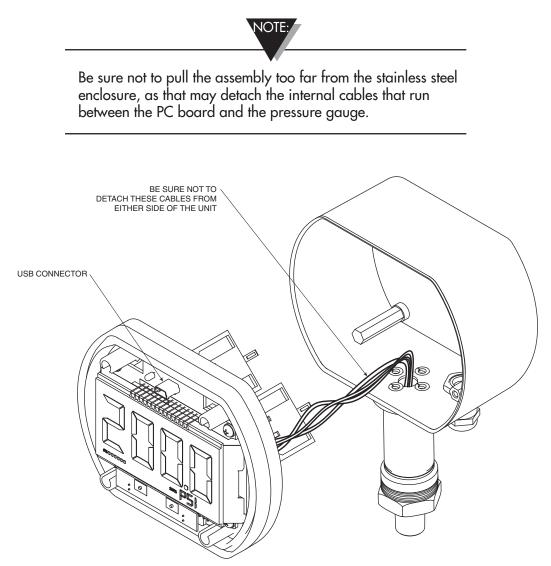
Front View of DPG409 with Meter Assembly Separated
